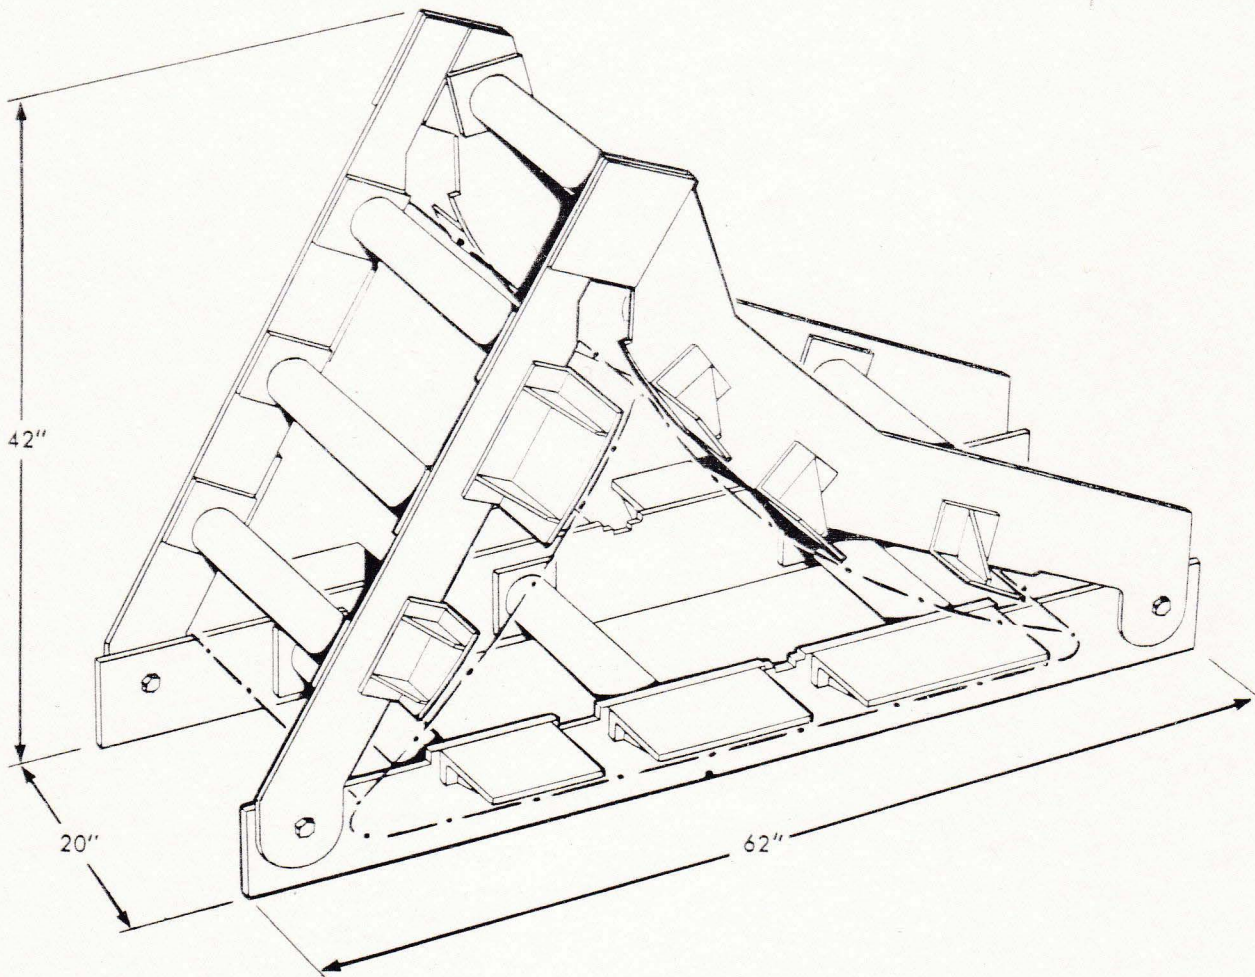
ASSEMBLY JIG FOR FUEL TANK
